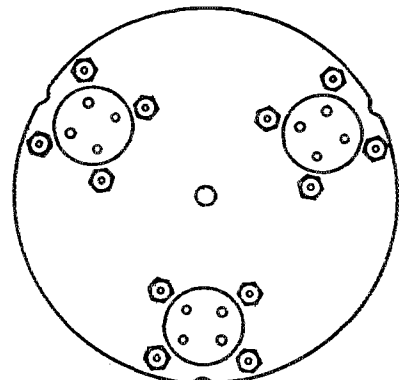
DIAGRAM OF COIL MOUNTS ON THE TURRET-HEAD
